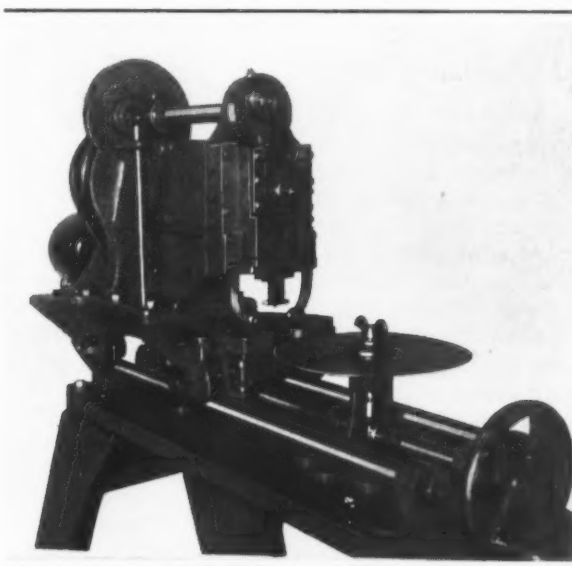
Dilks Automatic Plate-perforating Machine, Made in Wide Range of Sizes
